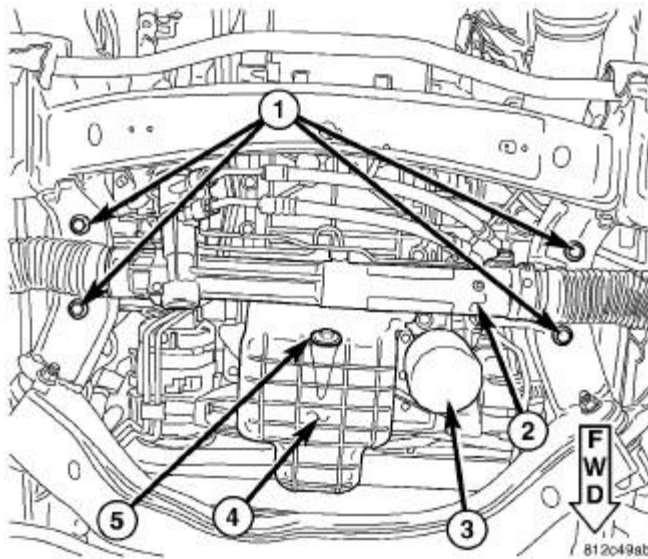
Identifying Engine Mounts, Oil Pan, Drain Plug & Oil Filter
